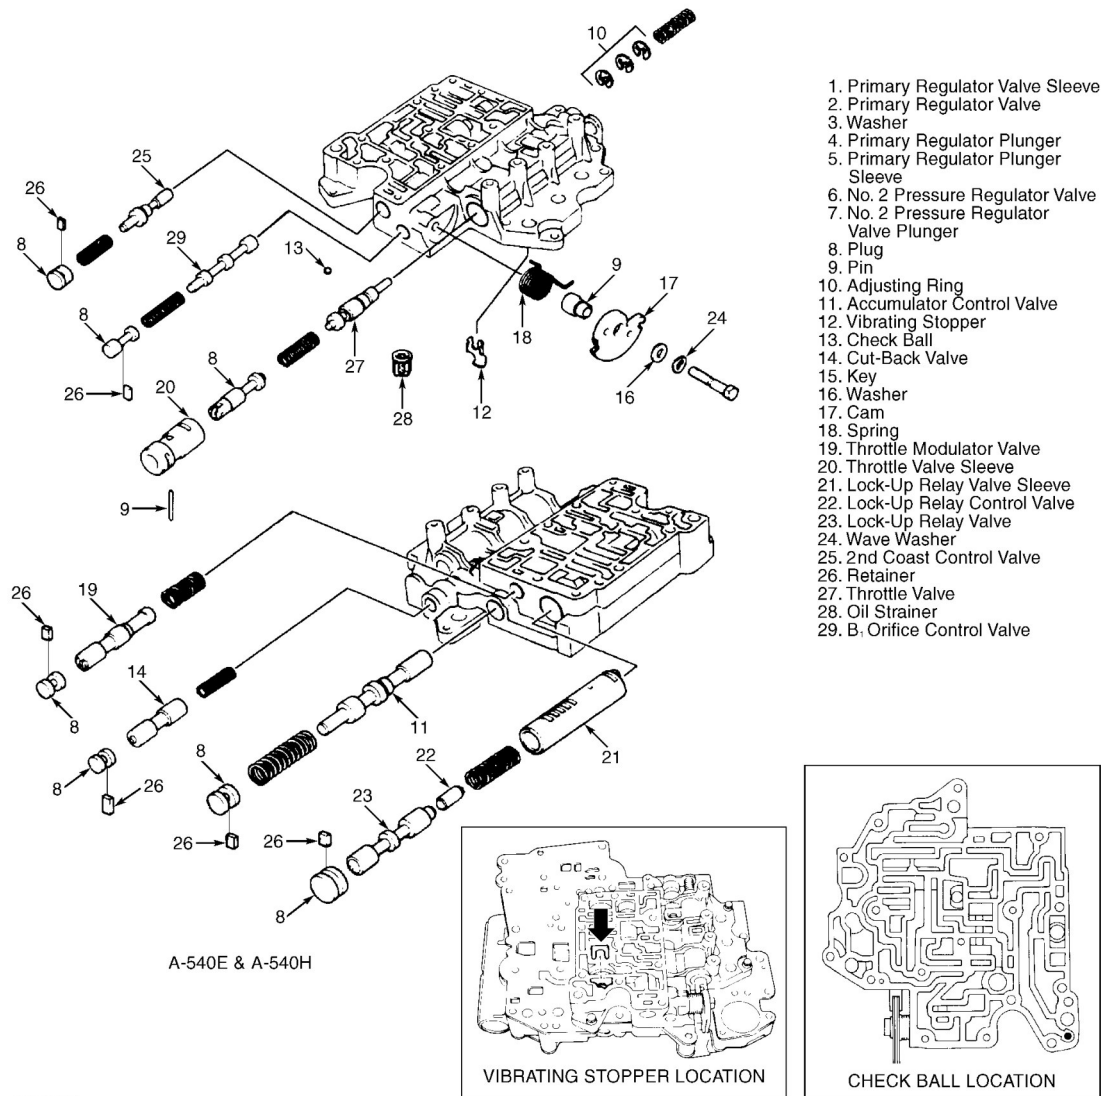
Exploded View Of Upper Valve Body (Viewed From Both Ends)
